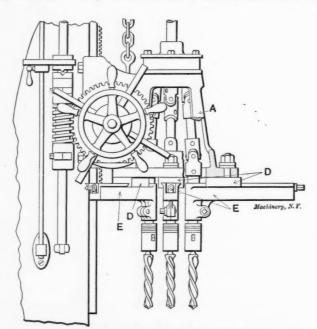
Multiple-spindle Drill provided with Improved Facilities for Adjusting the Drill Spindles.
